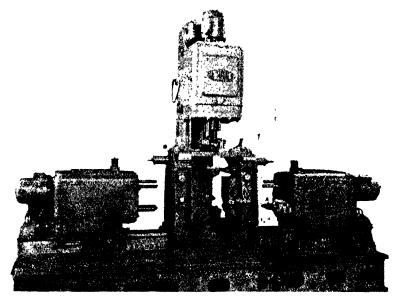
THREE-WAY MULTIPLE-SPINDLE DRILLING MACHINE, WITH HYDRAULIC FEED This is a special-purpose machine which has been designed to drill simultaneously the bolt holes on the rear end and two side faces of an engine transmission casing. The feeds on the three drilling heads are operated by electrically driven hydraulic feed units.
